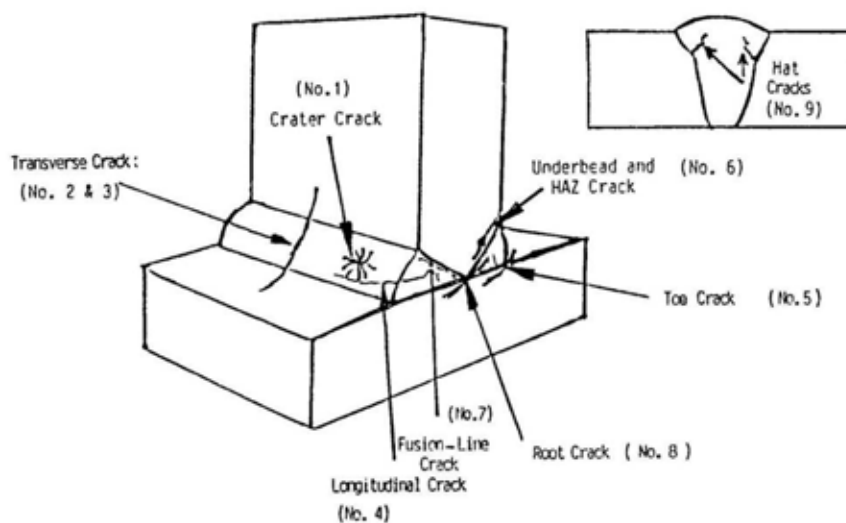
Different types of cracks located in and around a welded joint.
